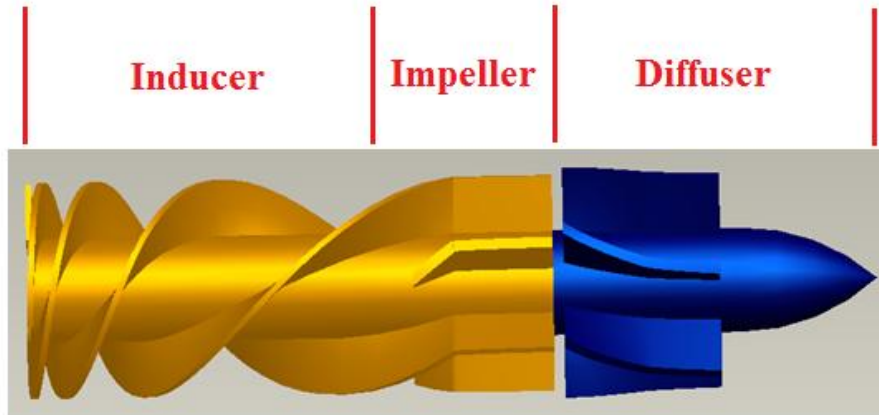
ProEngineer model showing the inducer, impeller and diffuser of the initial axial flow pump design.
